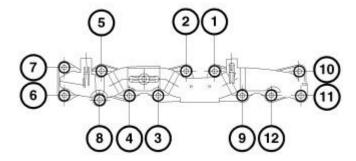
MANIFOLD - EXHAUST Courtesy of CHRYSLER LLC
